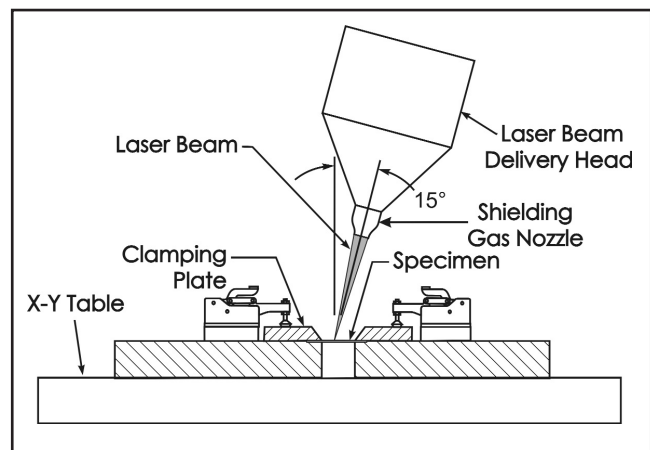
Schematic diagram of the welding jig and Nd:YAG laser beam delivery head.
